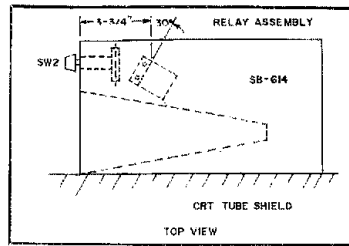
Physical placement of the relay assembly in the SB-614. The assembly is tilted approximately 30°. Inches (") \times 25.4 = mm.
